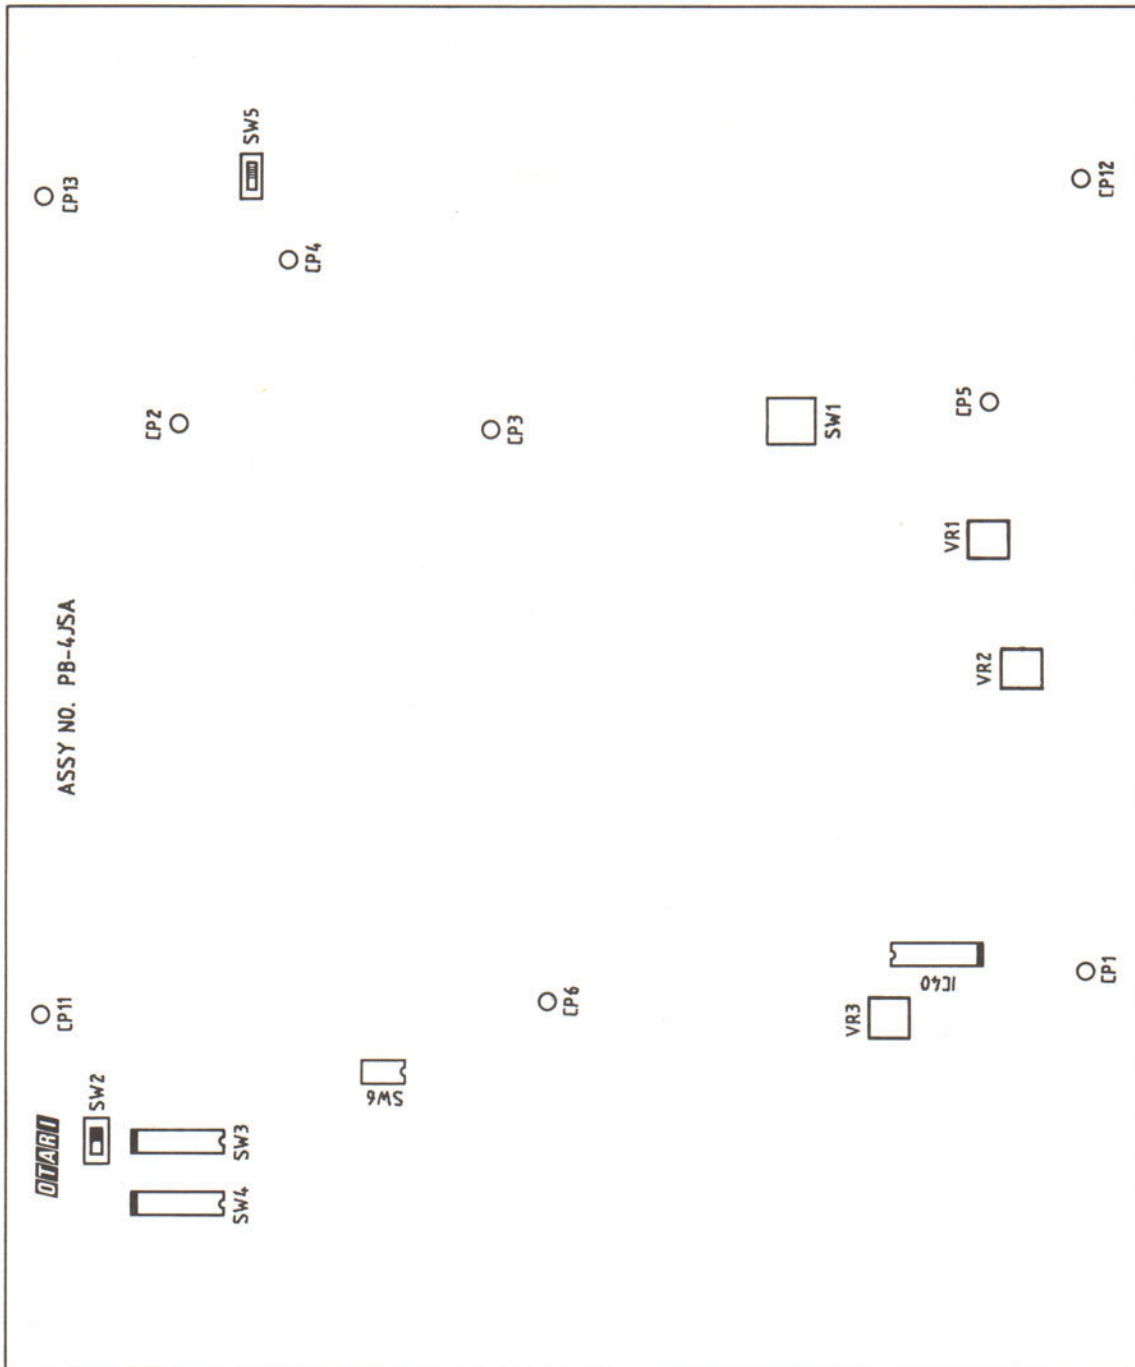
Location of Trimmers and Check Points on Transport Control PCB
